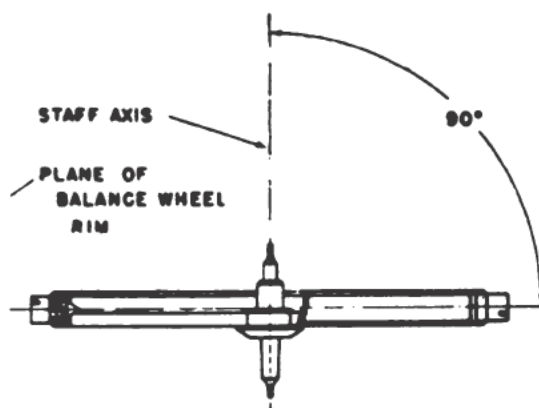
Balance wheel with all parts of the rim in the same plane.
